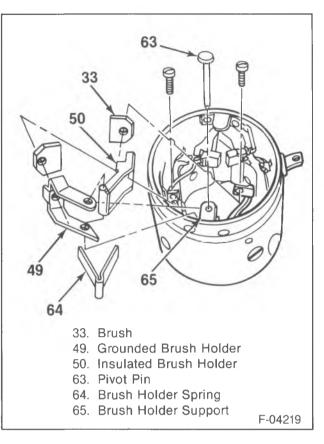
Replacing Brushes on the 10MT and 27MT Starting Motors
